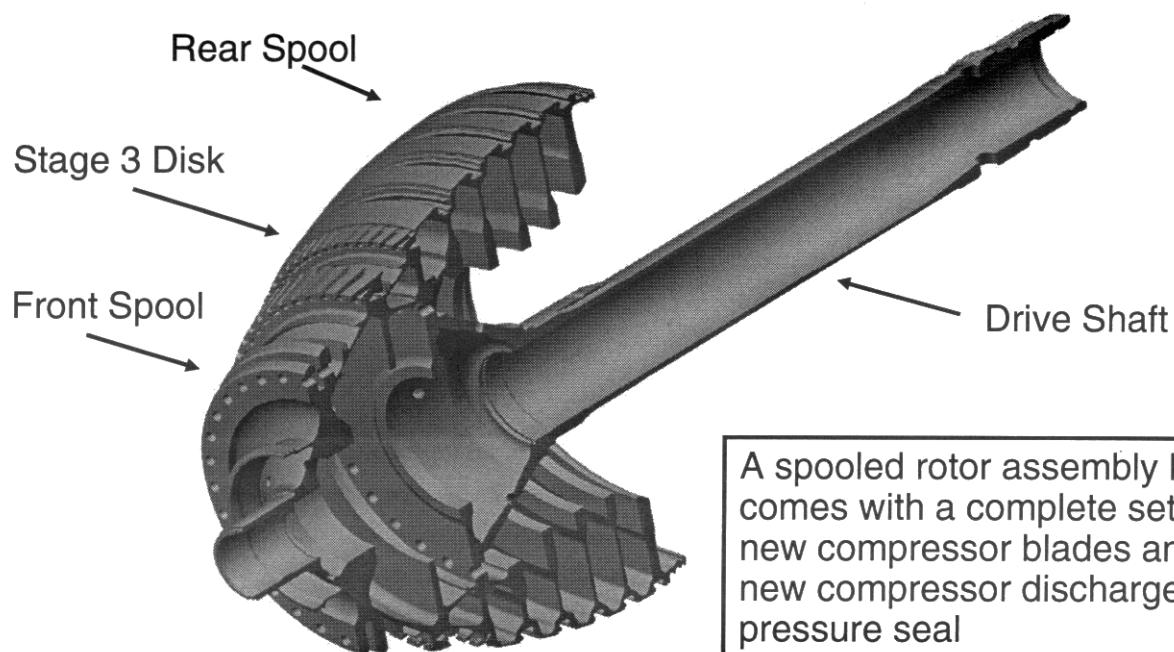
Redesigned Eight-Stage Compressor Rotor Assembly
